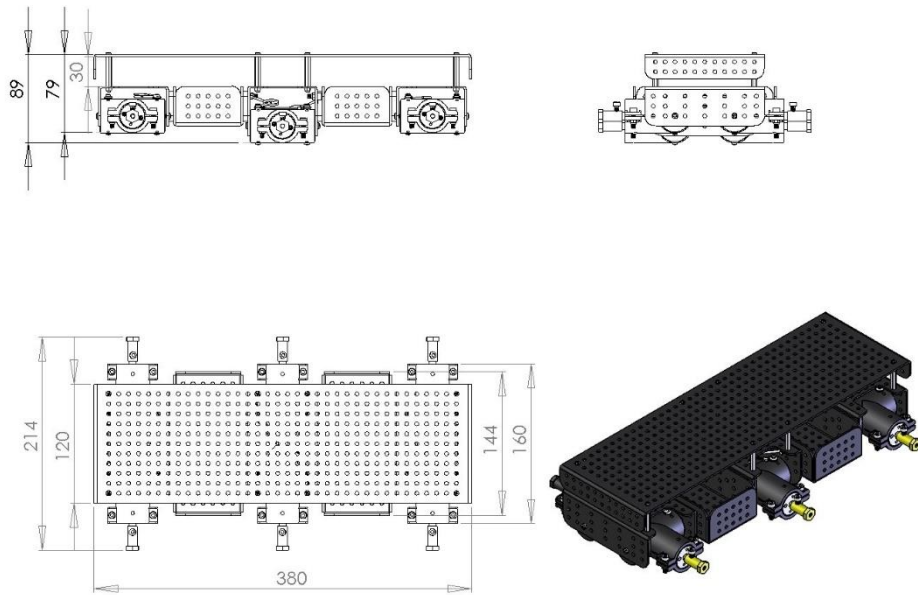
Rover chassis dimensions without wheels (Permission to reproduce pending)
